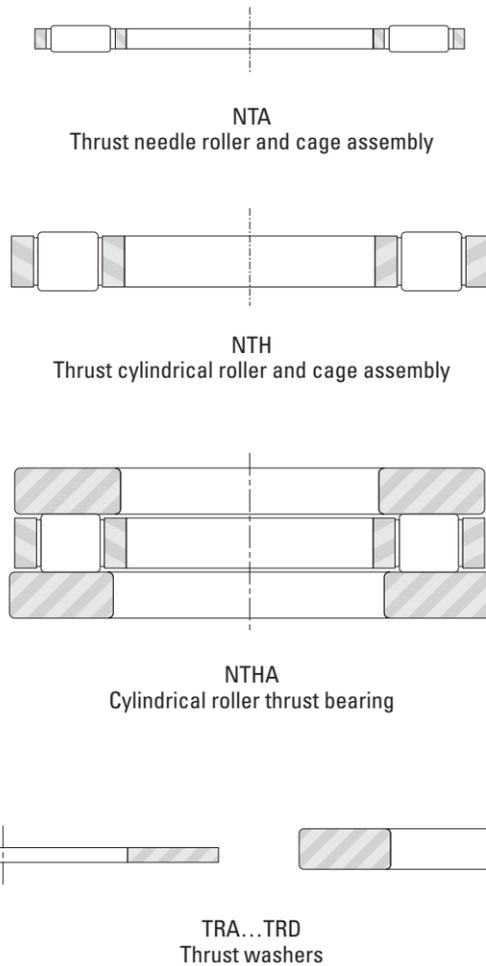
Types of inch series thrust assemblies, thrust bearings and thrust washers
